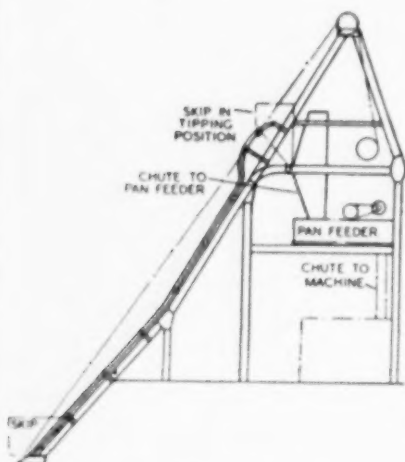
Skip hoist and feed arrangements to upright type of press
